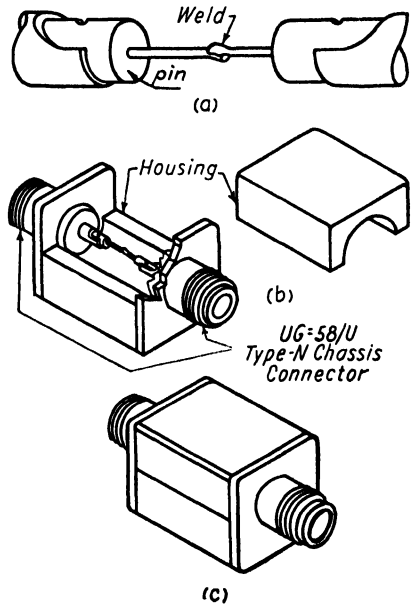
Thermocouple mounted as center conductor of short coaxial line.
